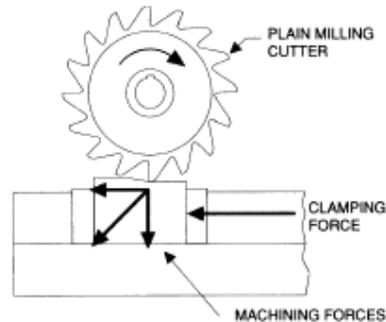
Cutting forces in a milling operation should be directed into the solid jaw and base of the vise.
